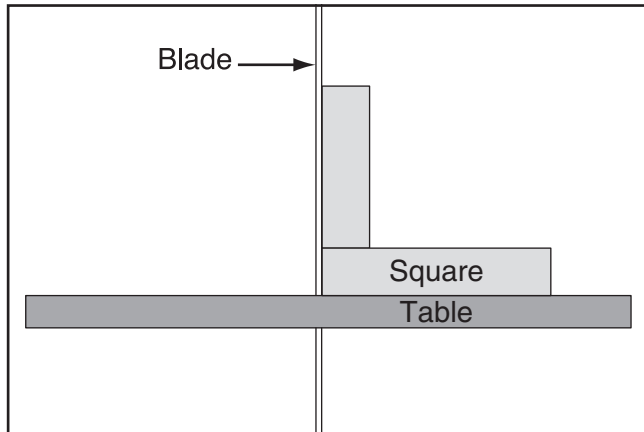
Using a square to adjust table perpendicular to the side of blade.
